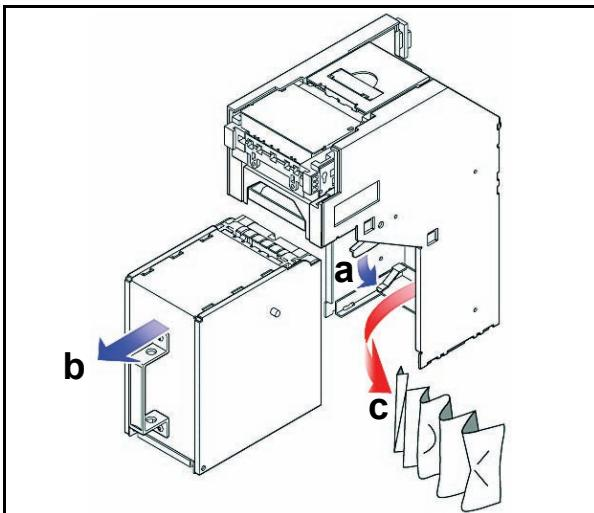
Clearing a Cash Box Inlet Bill Jam
